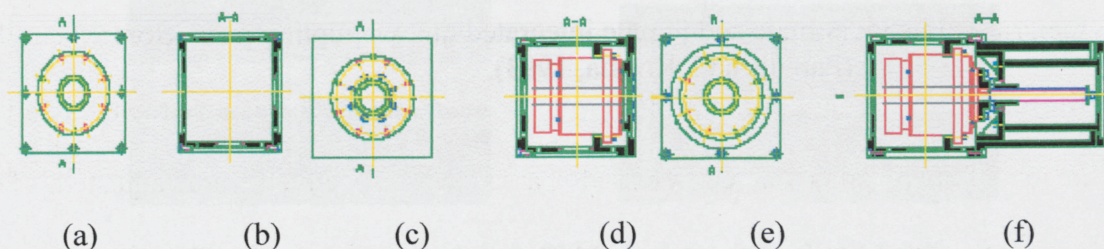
(a) & (b) Link module. (c) & (d) Revolute joint module. (e) & (f) Prismatic joint module (Chan and Yang,1996)
